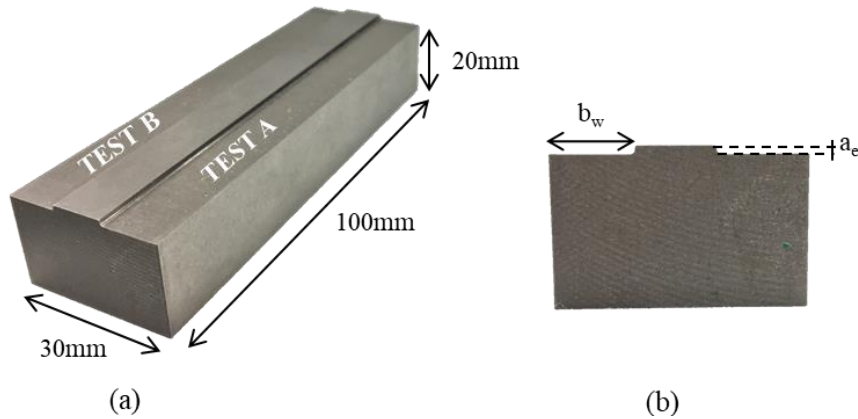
Workpiece (a) dimensions and two tests carried out, test A and test B and (b) side view of the workpiece highlighting grinding width and depth of cut of the grinding tests.
